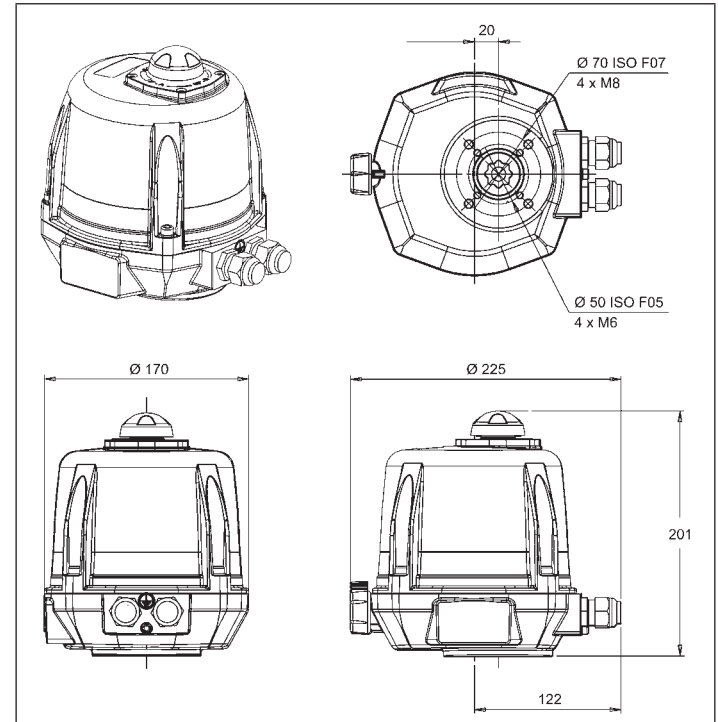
Dimensions Type 3005 at torque 25 - 75 Nm
